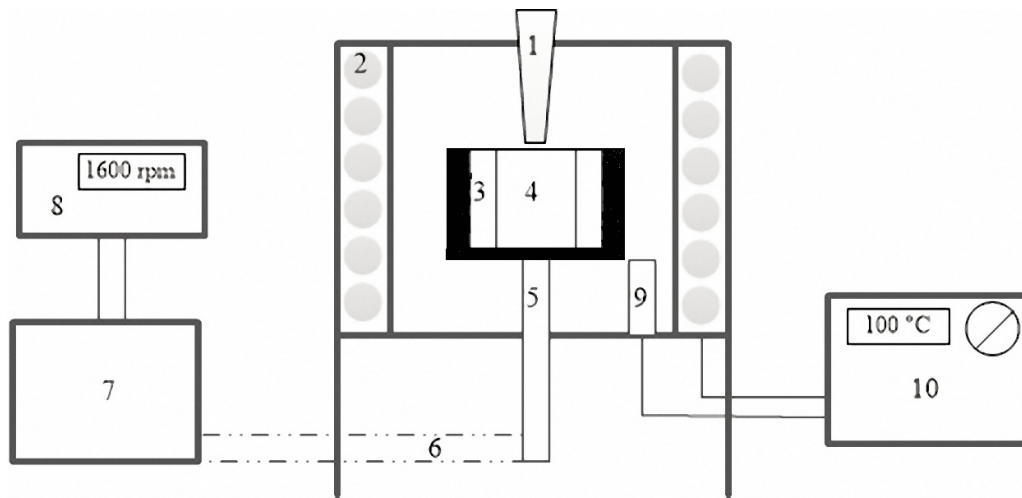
Schematic representation of vertical centrifugal casting (VCC) machine, (1) sprue (2) heating element (3) brass cylinder (4) die cavity (5) spindle (6) belt pulley (7) electromotor (8) inverter (9) thermometer attached to the heating generator (10) heating generator and controller.
